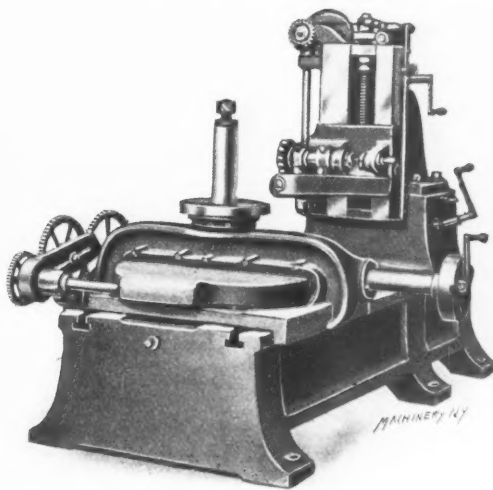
Heavy Armstrong Whitworth Gear-cutting Machine.
